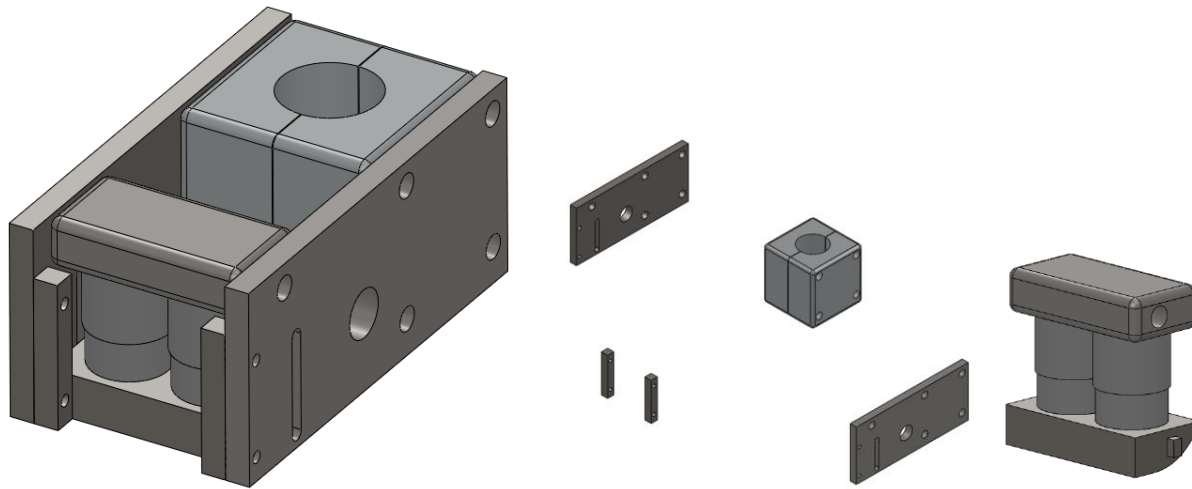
Solid Model of the collar system along with an exploded view and close-up of spring assembly.
